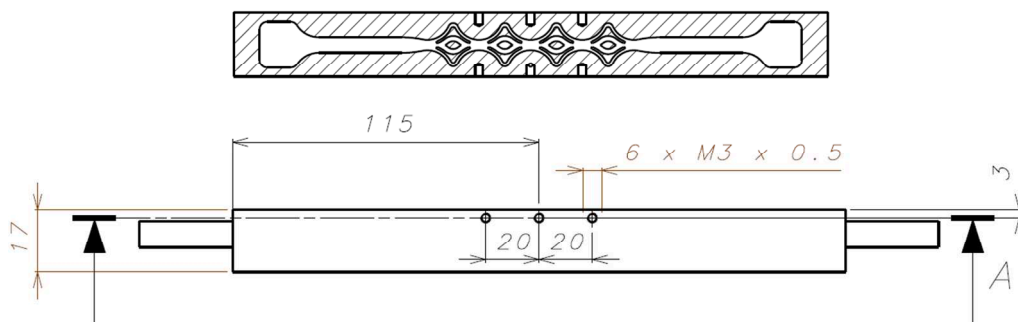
Technical Drawing of Baffle Channel SCP with TCs grooves (side view and A-A section).
